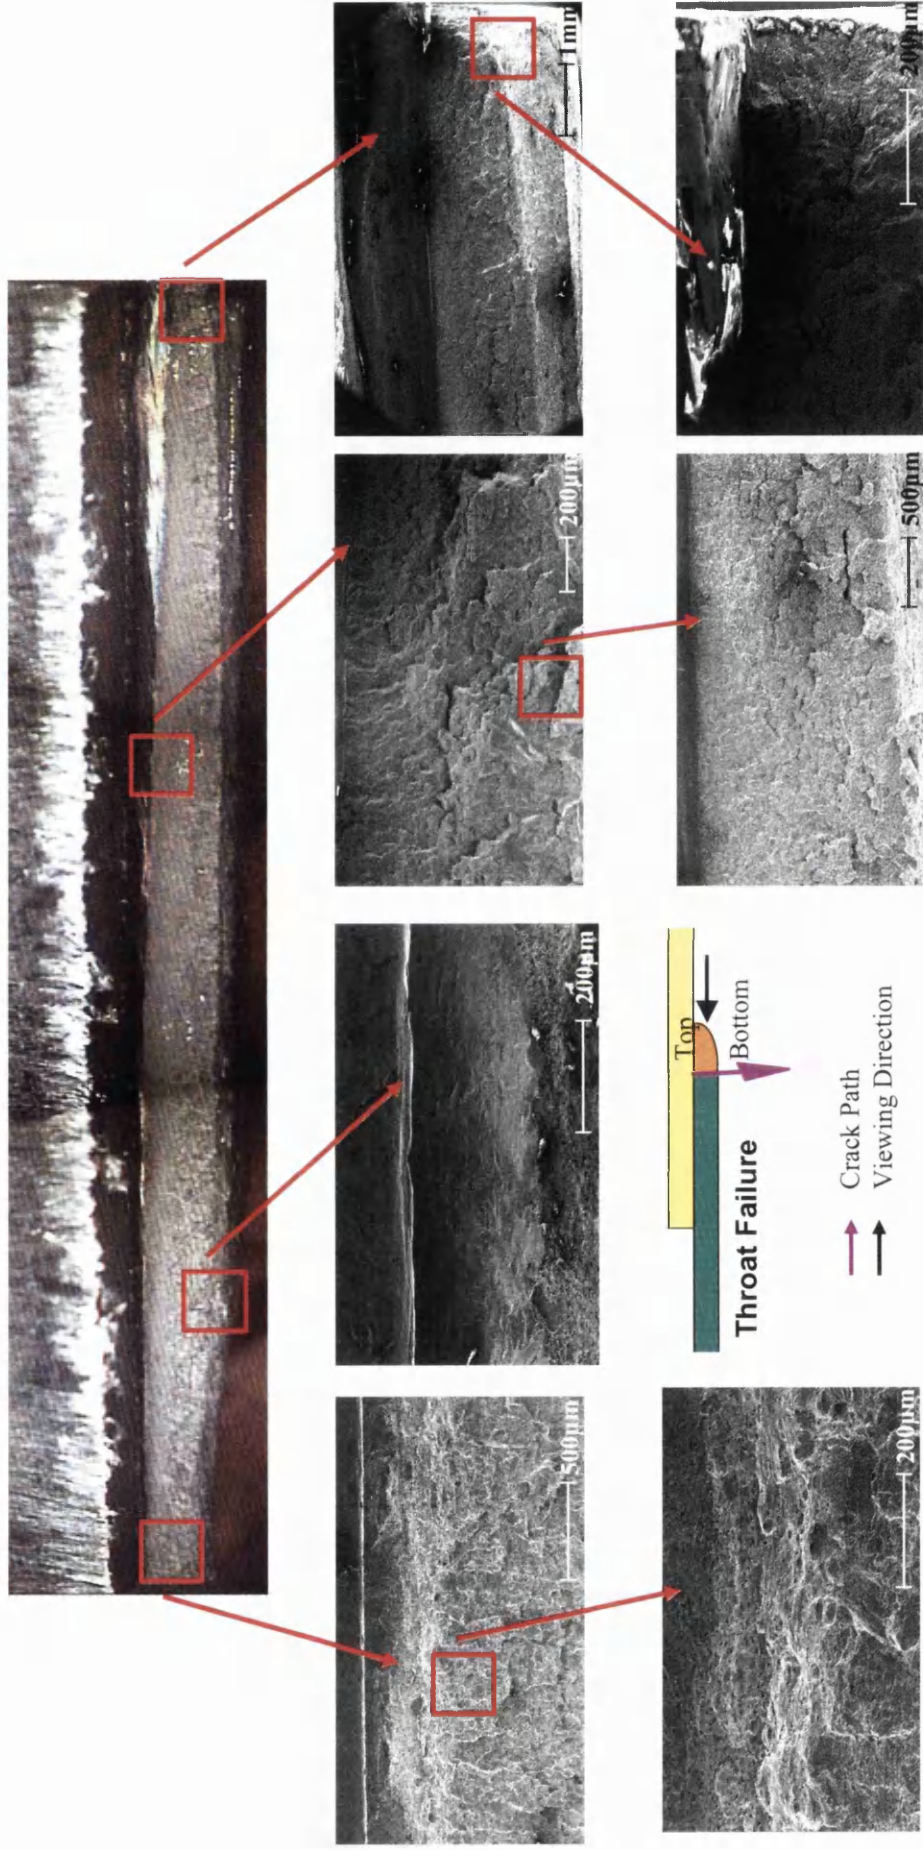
Typical Fracture Surface for TM2 Weld Throat Failure – Weld View
